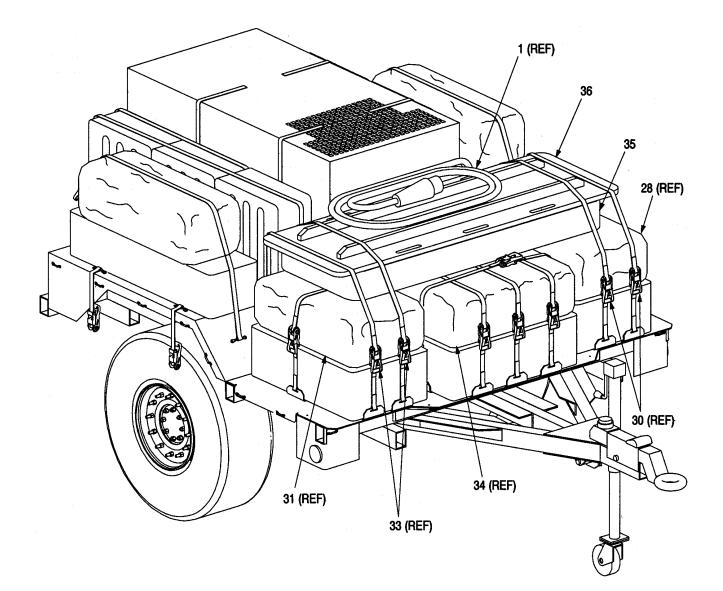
HMT Load Plan (Sheet 4 of 5)
